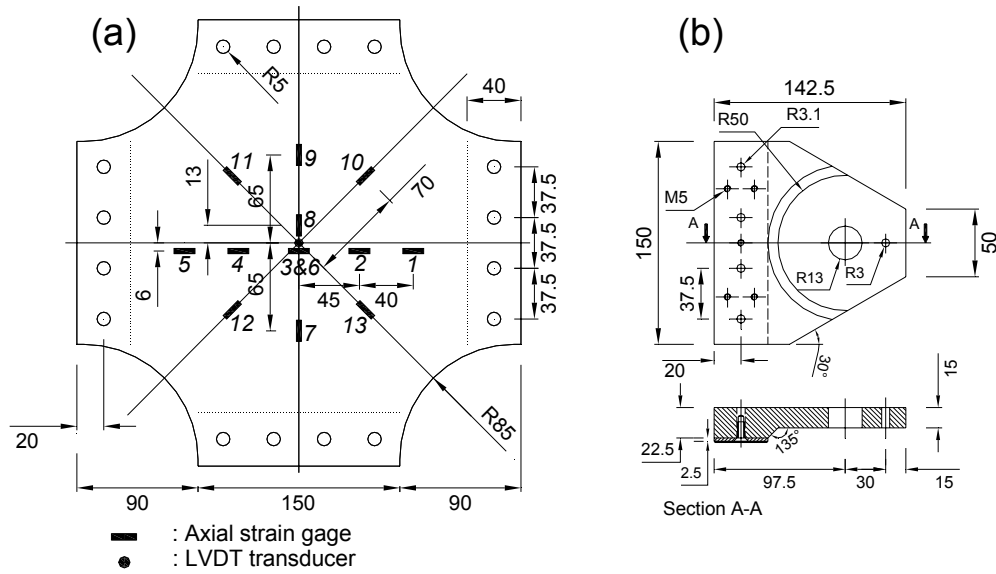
(a) Specimen geometry in [mm] and instrumentation; (b) grip configuration and dimensions.
